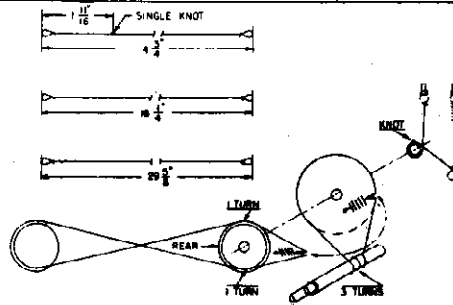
DRIVE MECHANISM ALIGNMENT
